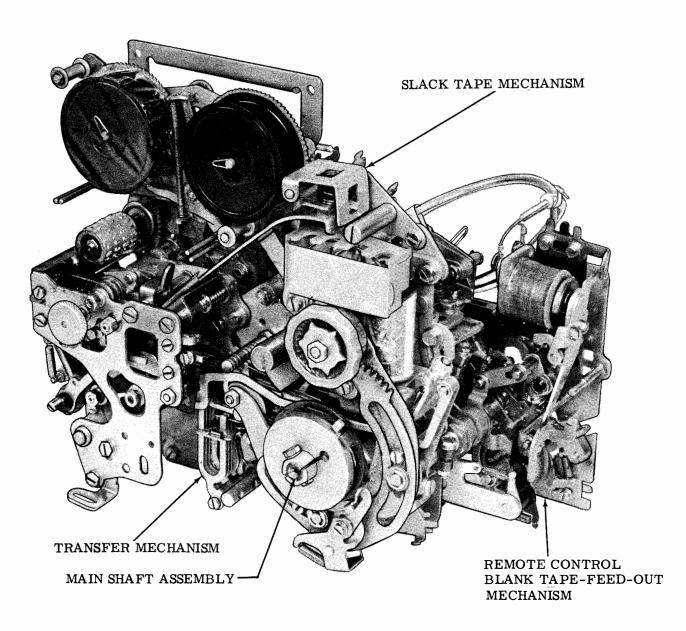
28 Typing Reperforator Unit With Remote Control BLANK Tape Feed-Out Mechanism (Fully Perforated Tape)
